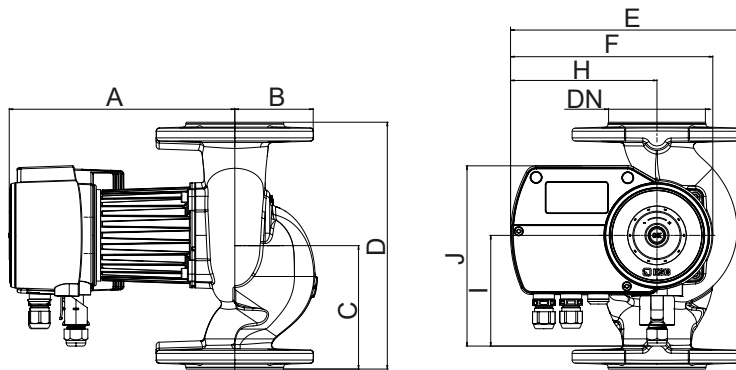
Flanged pump set ($P_1 \leq 400$ W)
